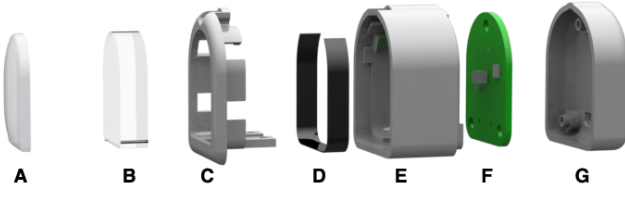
Exploded view of a DIGIT sensor. A) elastomer, B) acrylic window, C) snap-fit holder, D) lighting PCB, E) plastic housing, F) camera PCB, G) back housing [17].
